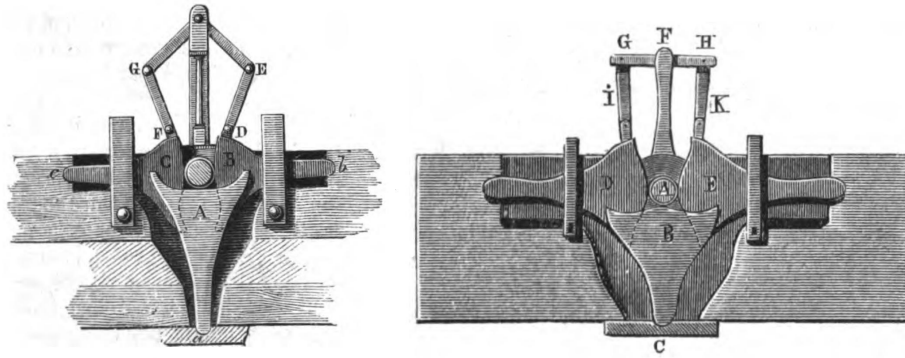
Left: Delaunay's drawing (1851) [8]. Right: Schrader's drawing (1860) [22].
